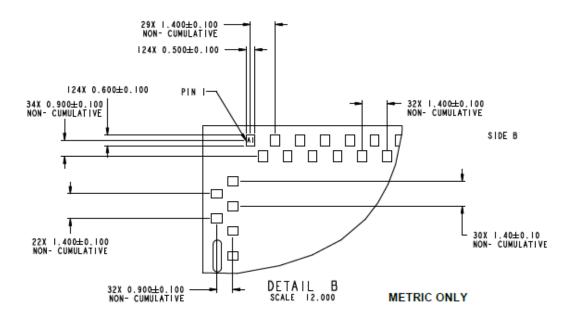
M20 module pinout dimensions-Detail B (in mm)
